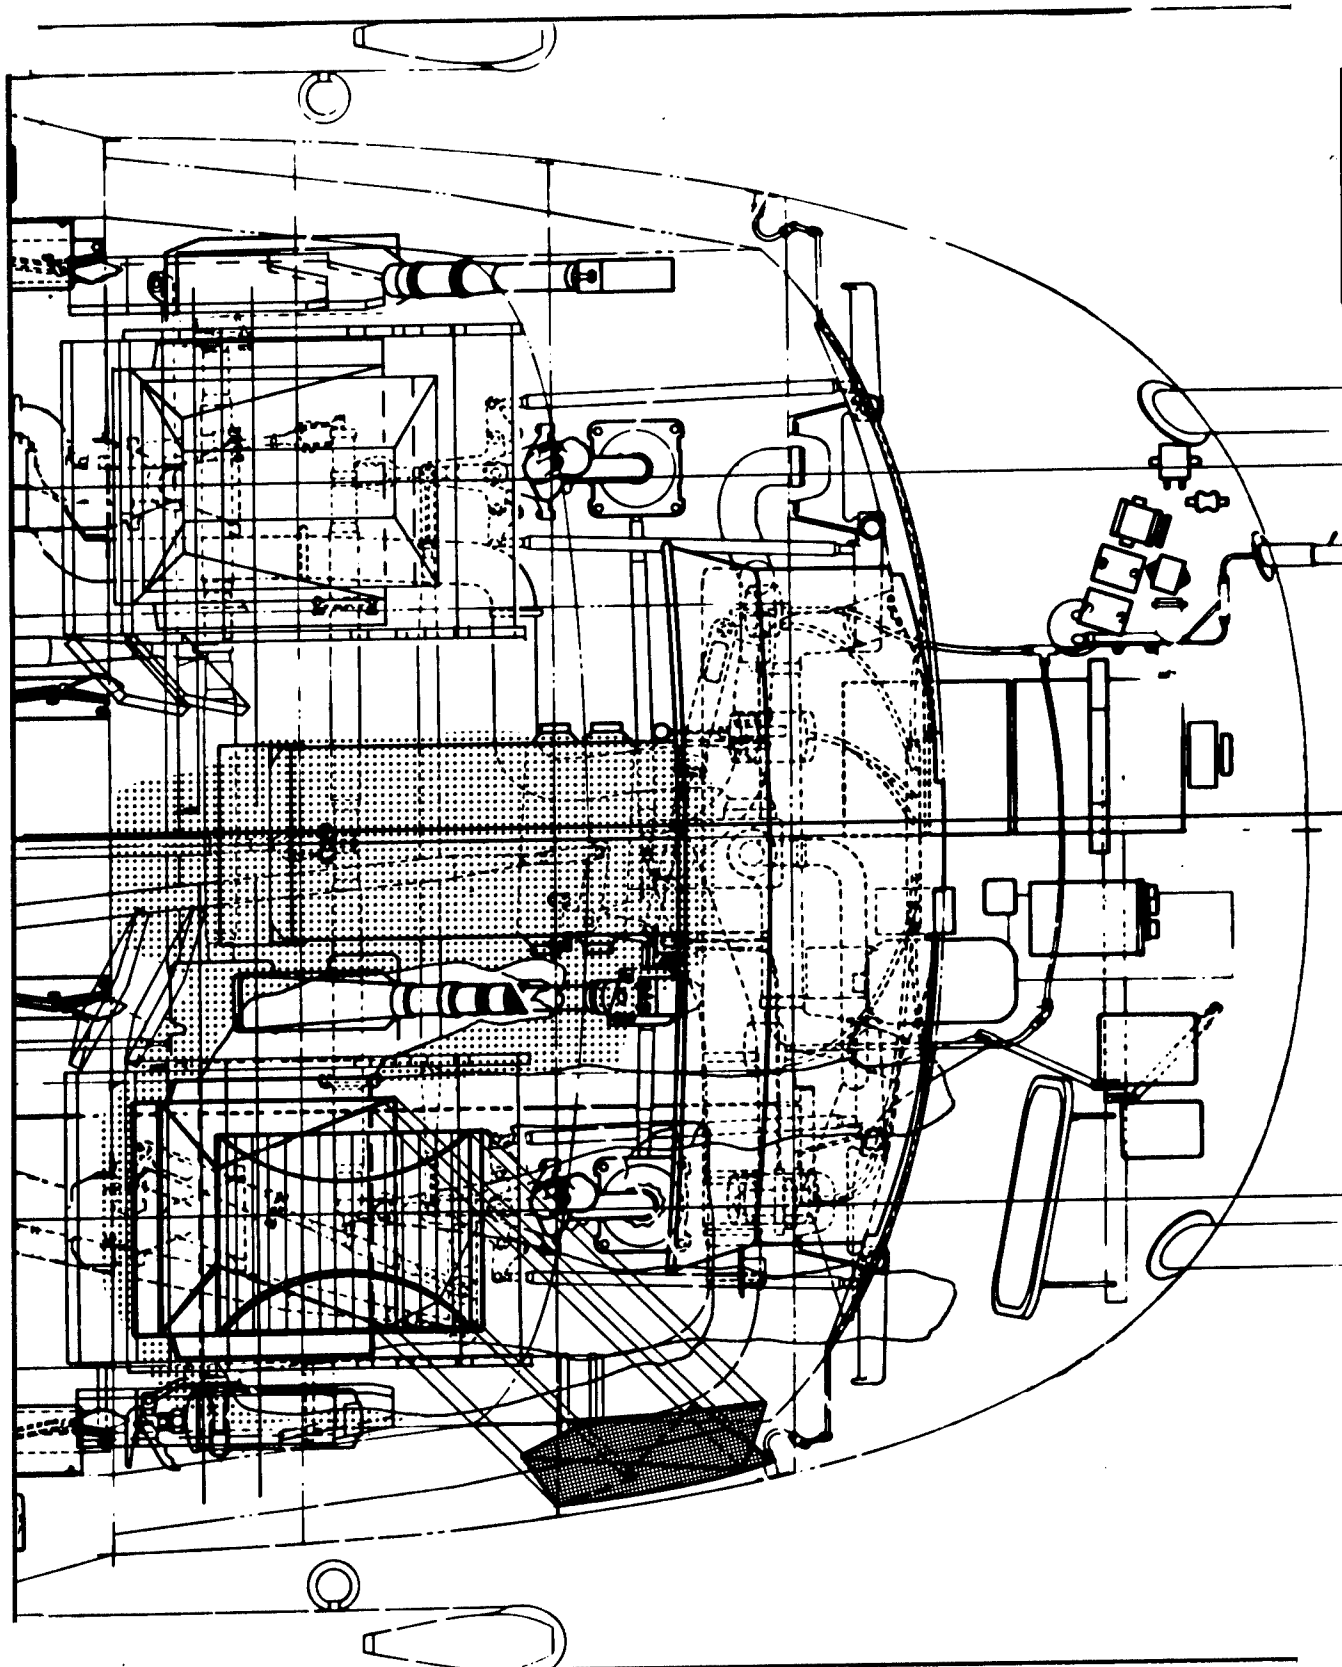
ARMOR CONFIGURATION 2 -- PLAN VIEW 45° AZIMUTH, -45° ELEVATION
